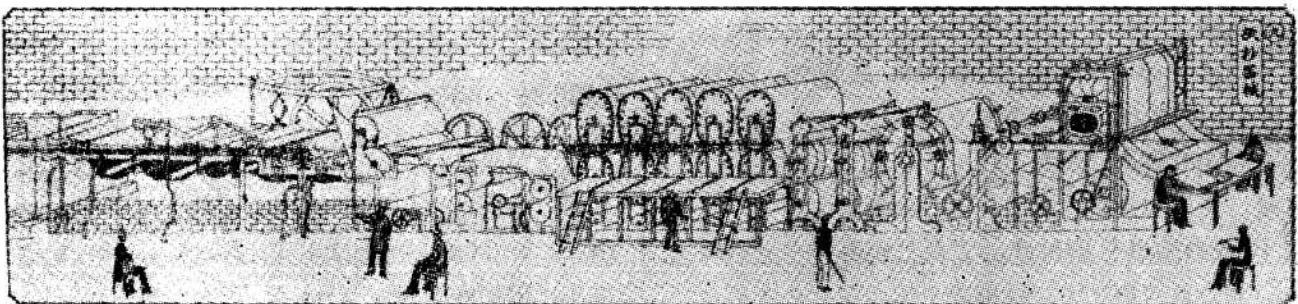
Picture of the first paper machine of Shoshi-kaisha
